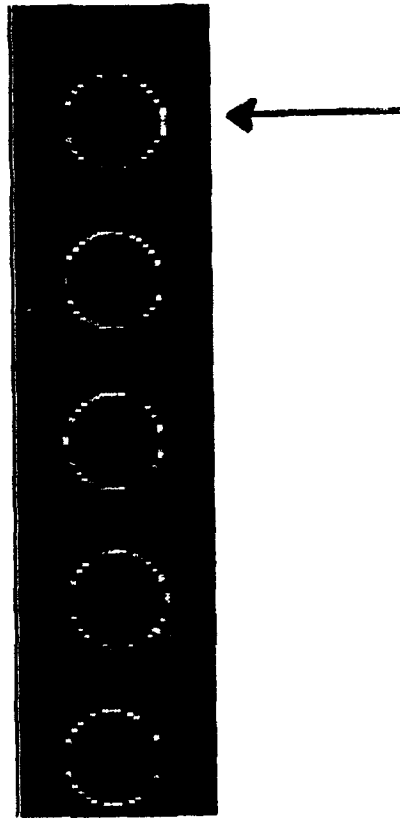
EDDY CURRENT IMAGE OF FIRST-LAYER FLAW (EXTENDING 0.05 INCH BEYOND FASTENER HEAD) IN FASTENER HOLE OF T-38 AIRCRAFT WING.
